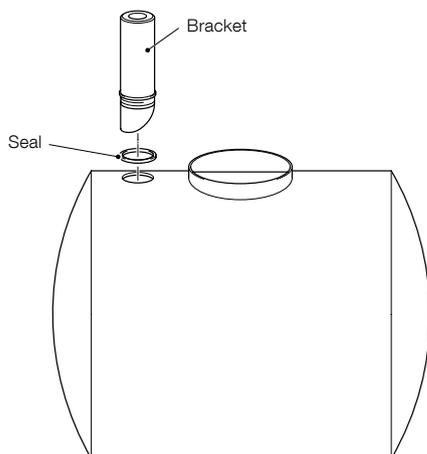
Installing the mounting bracket on a tank with the seal
